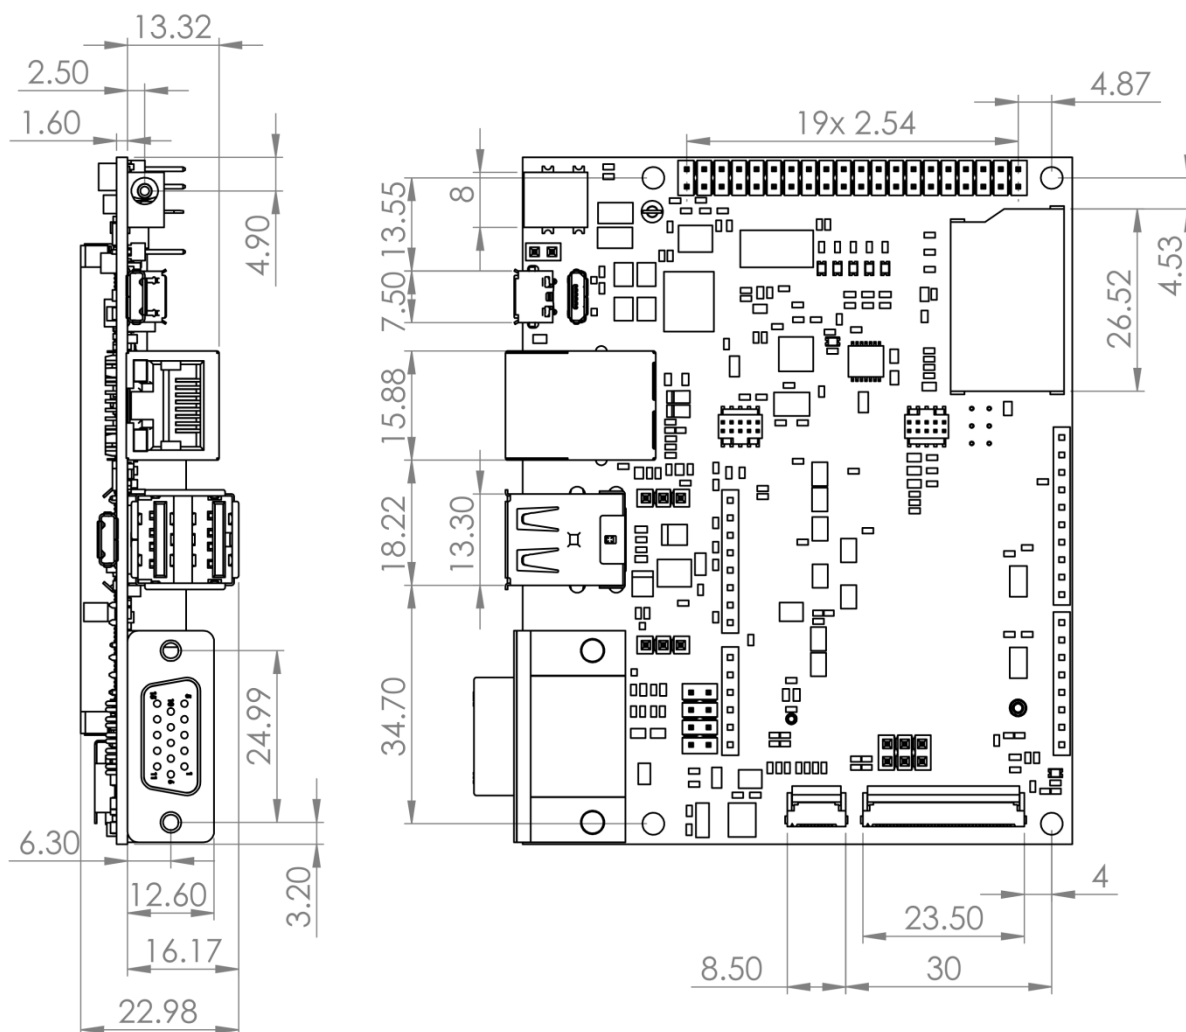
Dimensions – Top Side, all dimensions are in millimetres (mm)
